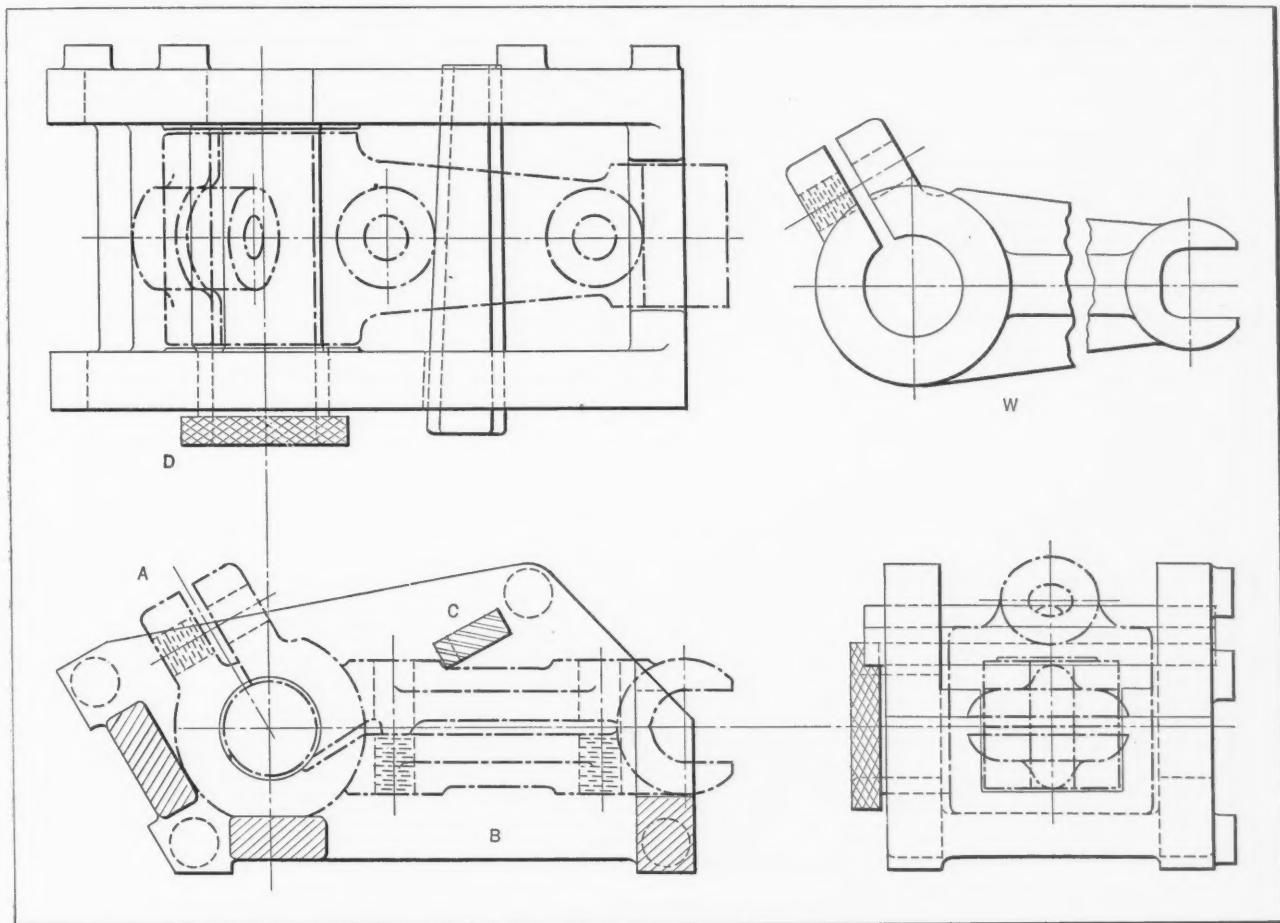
Jig for Drilling a Two-piece Lever Designed to Replace the Solid Lever *W
